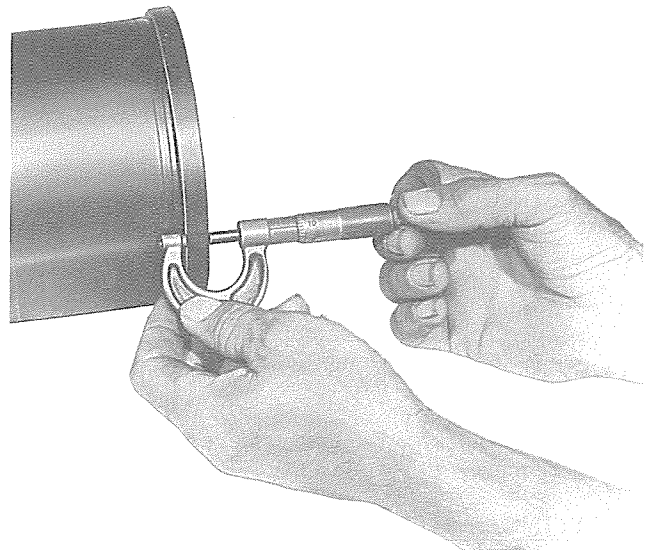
Measuring Width of Cylinder Sleeve Flange
